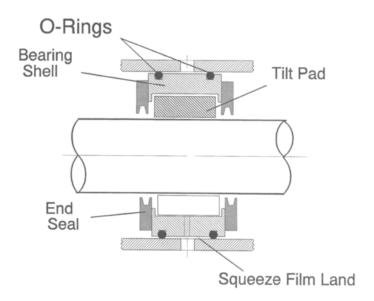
Schematic of an o-ring supported squeeze film damper.
